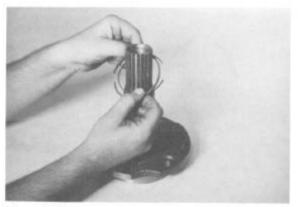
Install new oil sealing ring expander spring and oil sealing ring on reaction member support.
